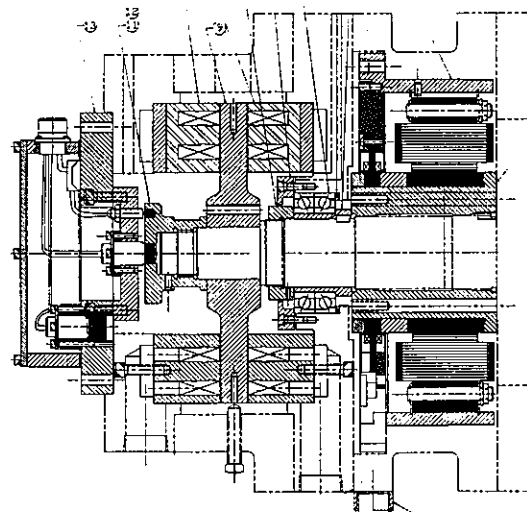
Radial and axial magnetic bearings on non-drive end of pump.
